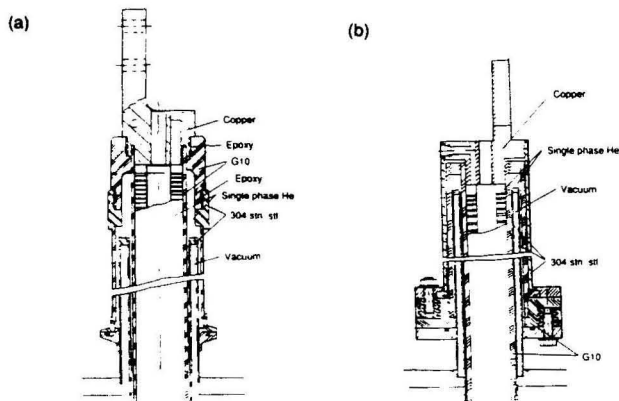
(a) The previous Fermilab design. (b) The new SSC/Fermilab warm electric insulator design of 10,000 A-power lead assembly.
